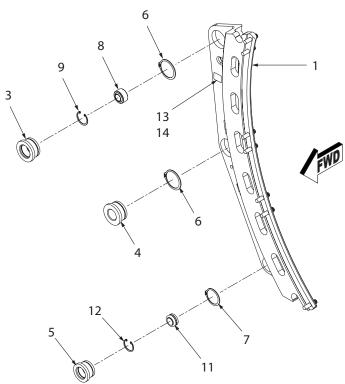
AGSE-E17611-S03 RH Support Bracket Assembly
